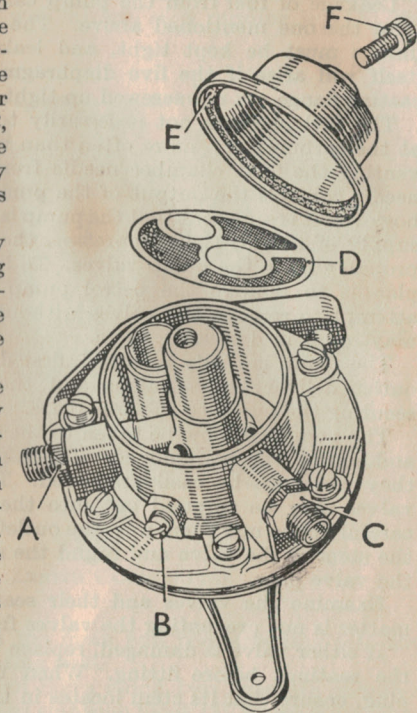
THE PETROL PUMP WITH THE COVER REMOVED
